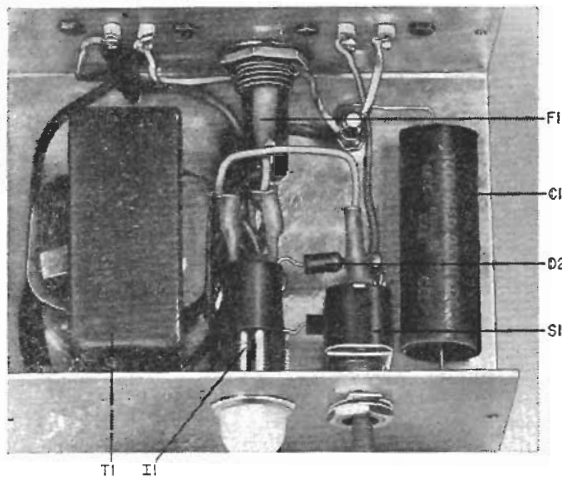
The power supply can be built in one end of the chassis and made compact.
